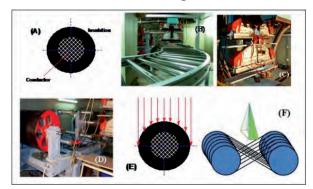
EB crosslinking of cables at BARC (A) Cable cross section (B) 5 MeV EB accelerator (C) 4-channel EB horn (D) Drum conveyor (E) Cable cross section one side irradiation (F) Continous 8-shape conveyor for both side crosslinking of cable
